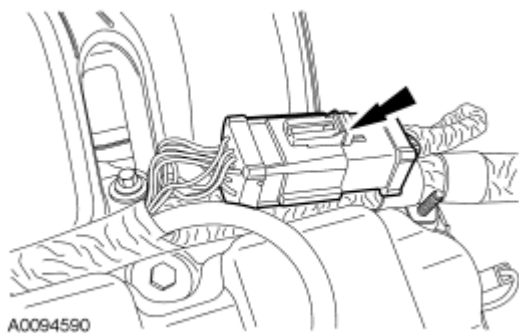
Locating Fuel Charging Wiring Harness Electrical Connector
